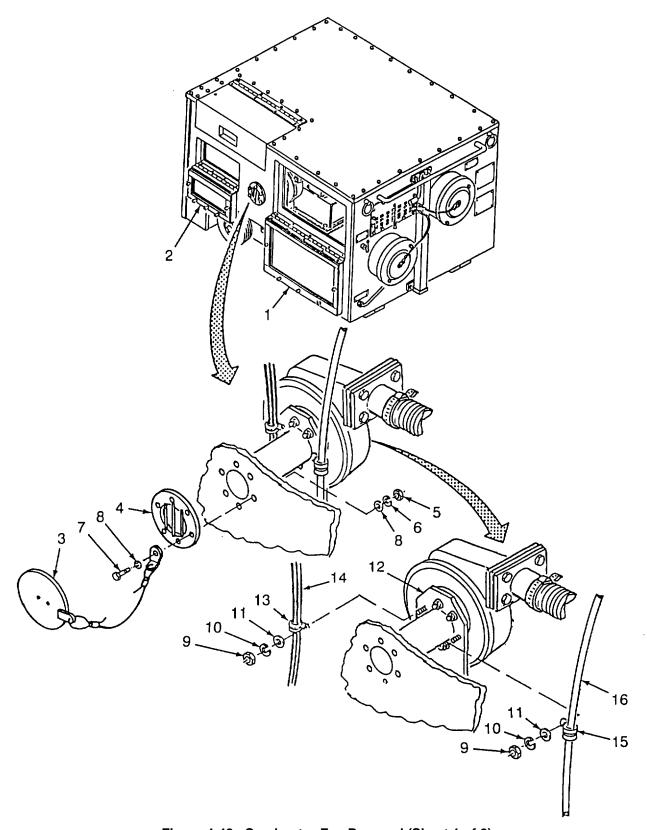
Combustor Fan Removal (Sheet 1 of 2)
